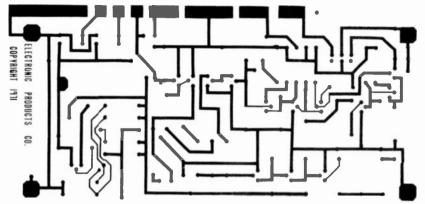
PRINTED CIRCUIT BOARD, reduced to one-half its actual dimensions.
